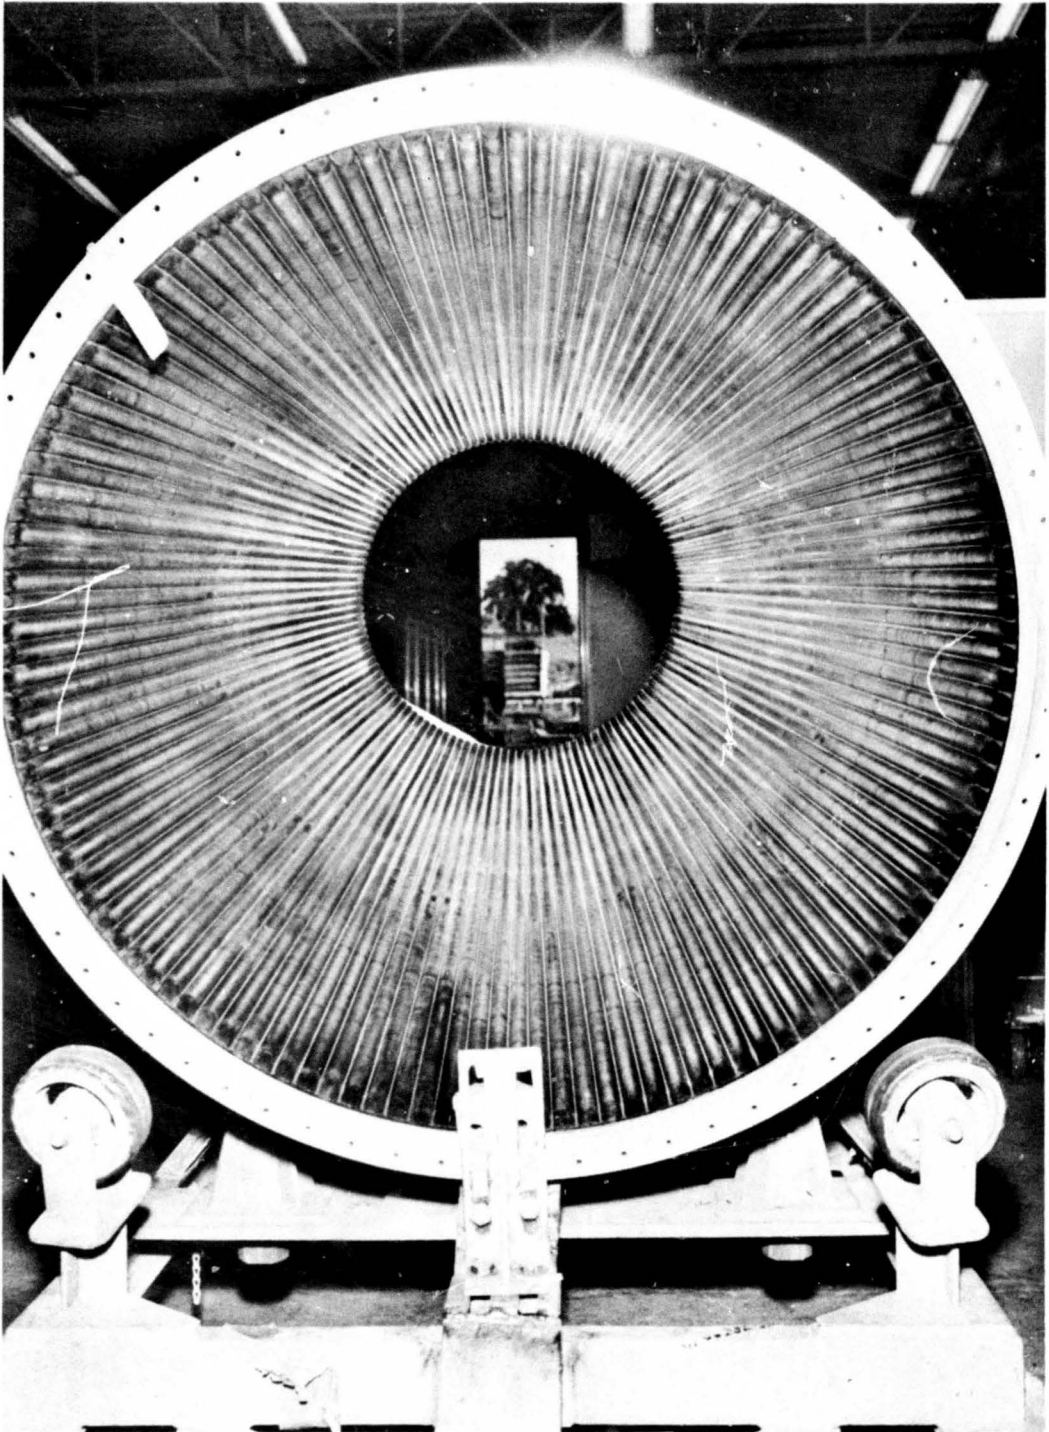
Combustion Chamber after Test No. 3051-D01-1A-005
